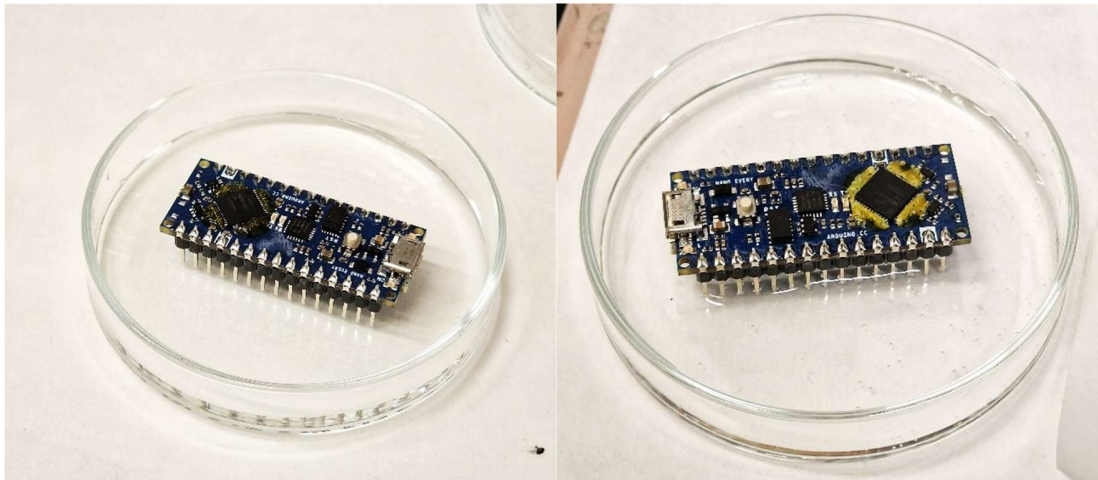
Left: PCB with printed desoldering paste immediately after printing, right: PCB with printed desoldering paste after 30 'embedded in 'heat wet' at a temperature of 60 ° C.
